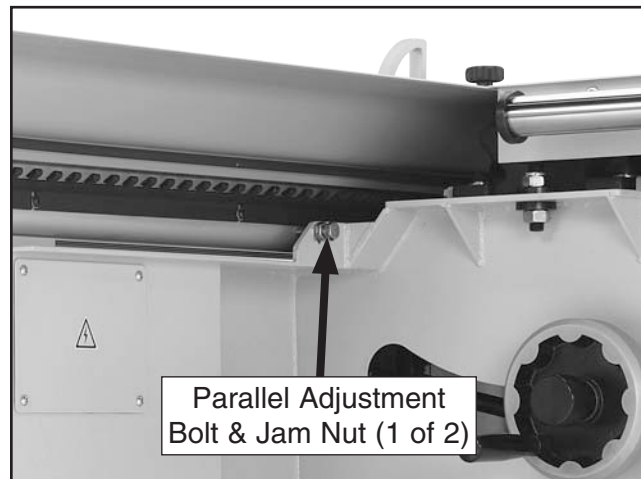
Sliding table parallel adjustment bolt (1 of 2).
